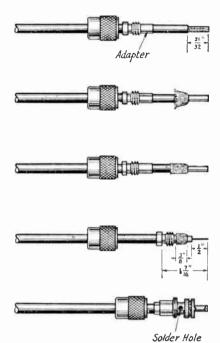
Method of assembling  $\frac{1}{4}$ -inch cable, Amphenol Type 83-1SP plug and adapter.
